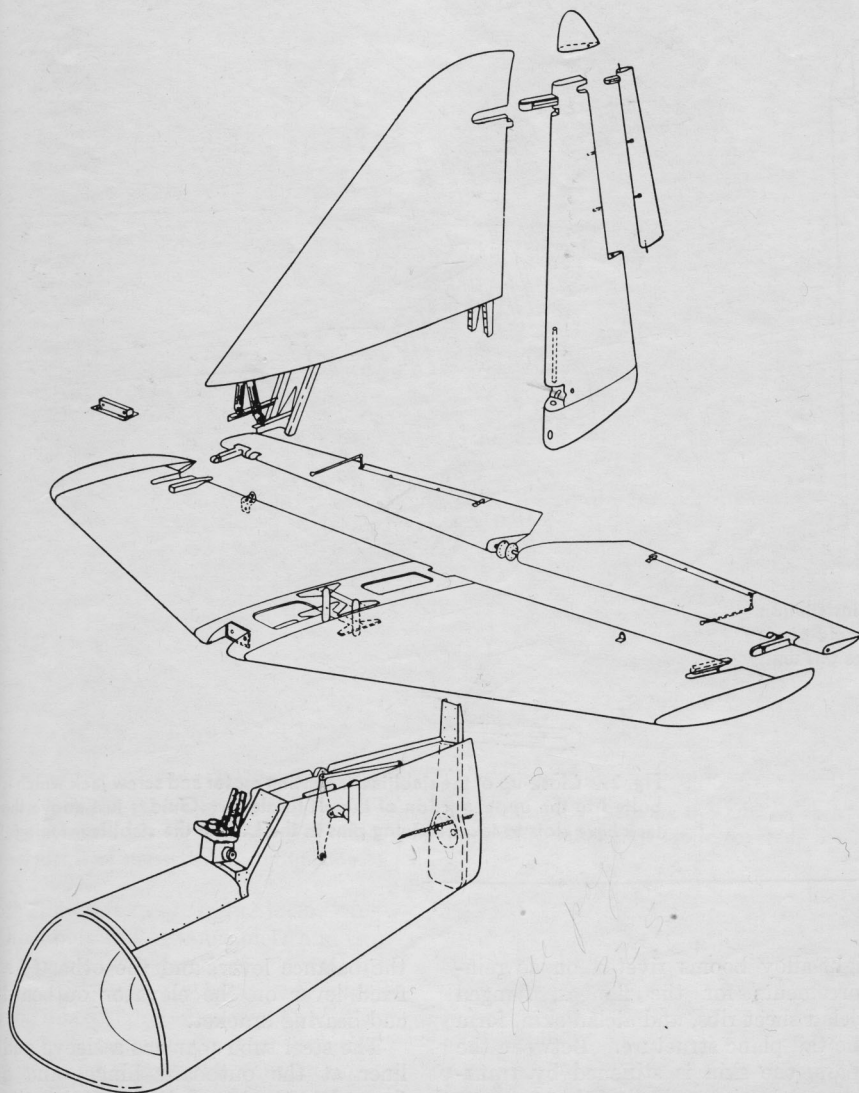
Exploded view showing the construction of the empennage. In assembling the Me-262, the stabilizer is put in place, then the vertical fin is bolted to the aft fuselage section.
